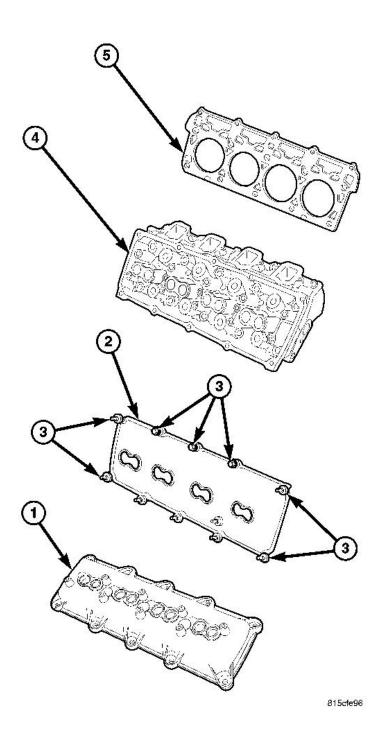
Head Gasket & Oil Holes Courtesy of CHRYSLER LLC
